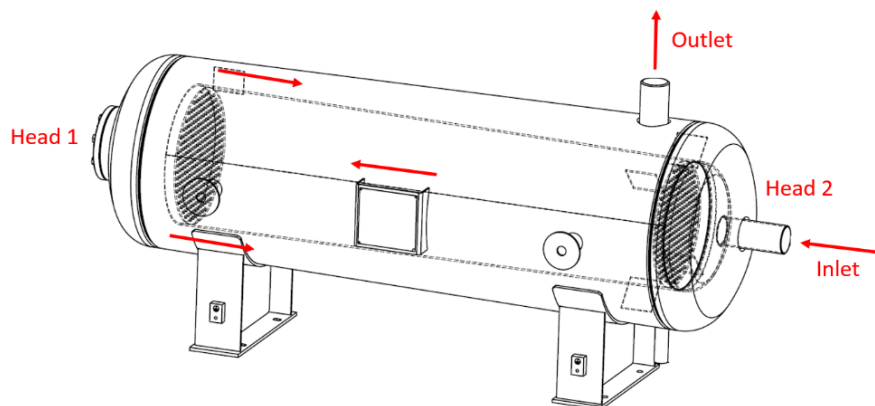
Three-dimensional drawing of the delay tank [54].
